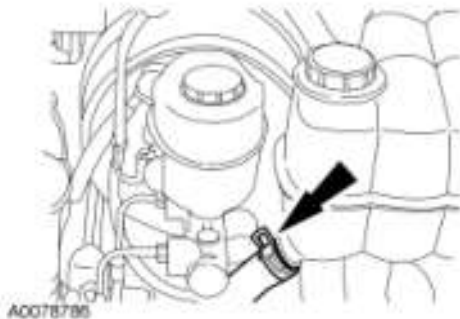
Locating A/C Manifold And Tube Assembly And Position Aside
